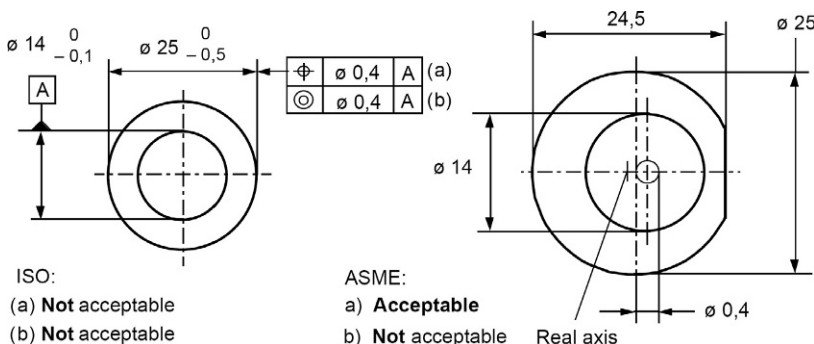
Difference between position tolerance and coaxiality tolerance according to ASME Y14.5-2009 (workpiece within position tolerance but outside concentricity tolerance)
